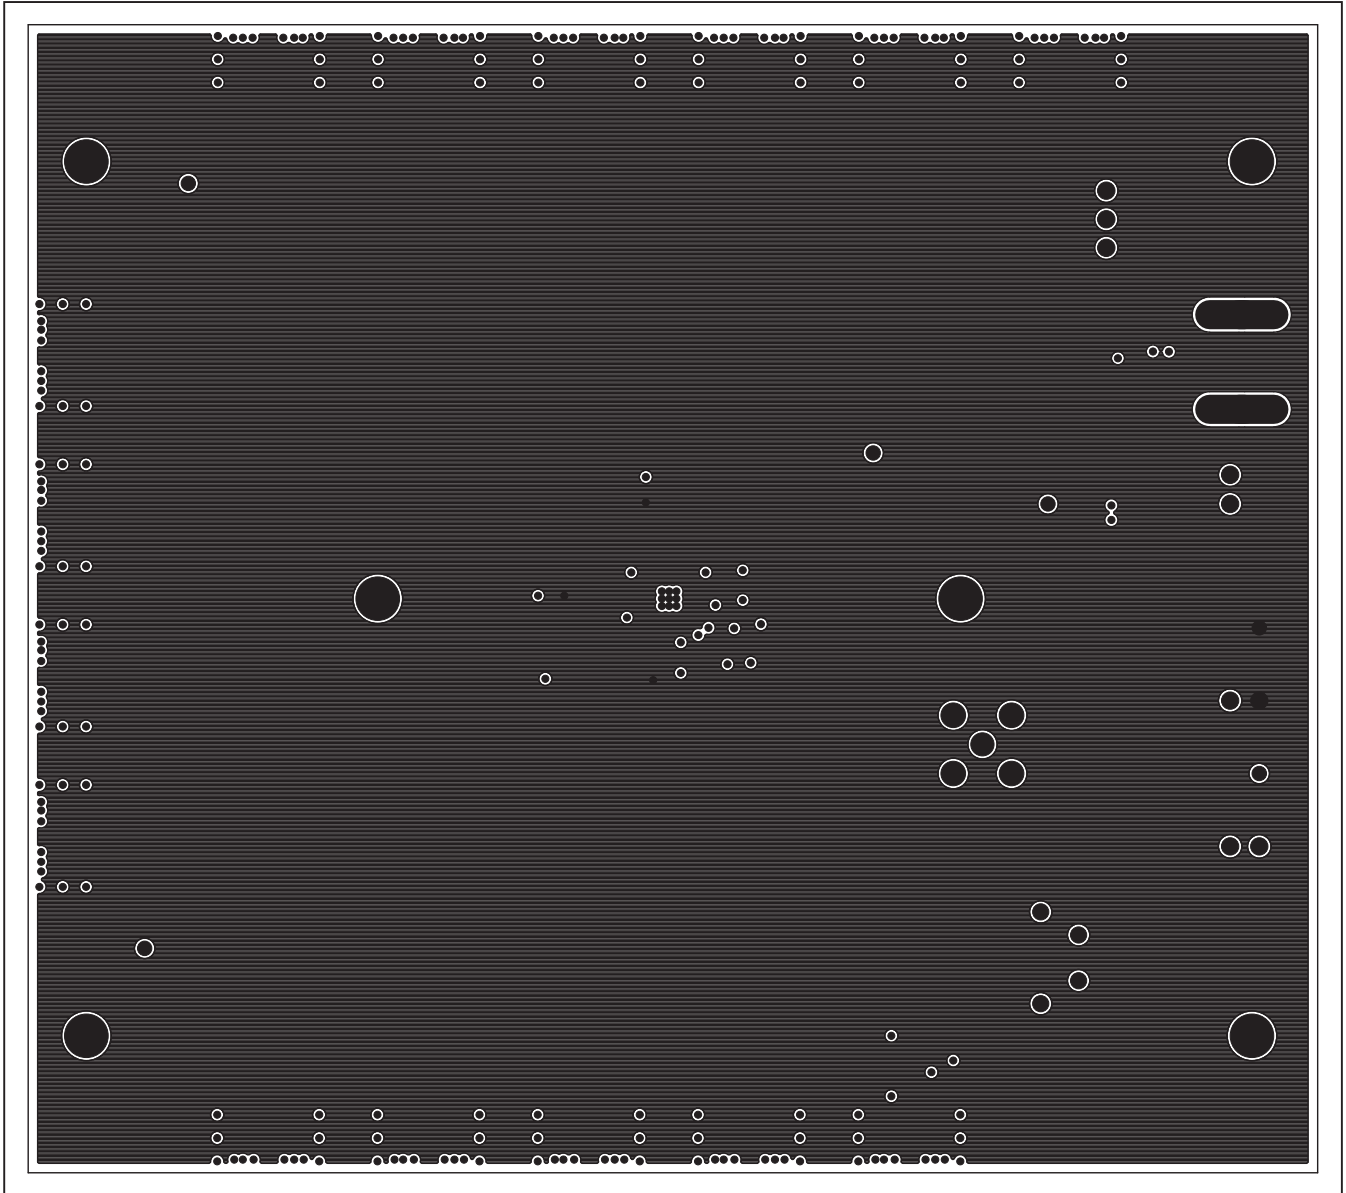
MAX3677 EV Kit PCB Layout—Power Plane
